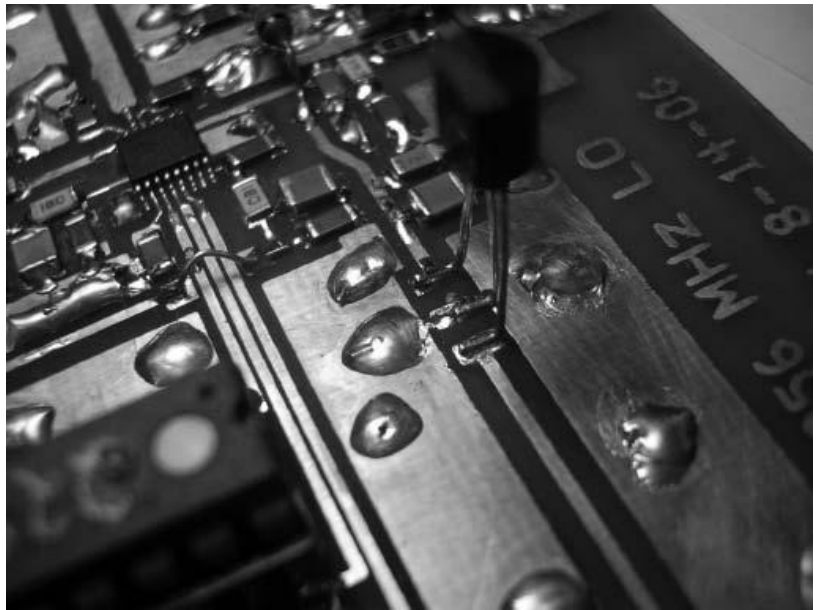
This photo shows how the leads of a regulator are bent to solder the "feet" to the circuit board traces. The solder "blobs" are covering ground wire connections to the bottom of the board.
